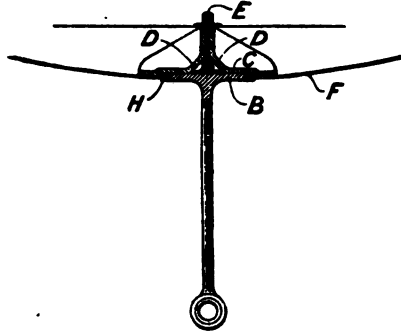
Propeller-shaft Support of Parsons and Wass: Rear support of centre shaft.
